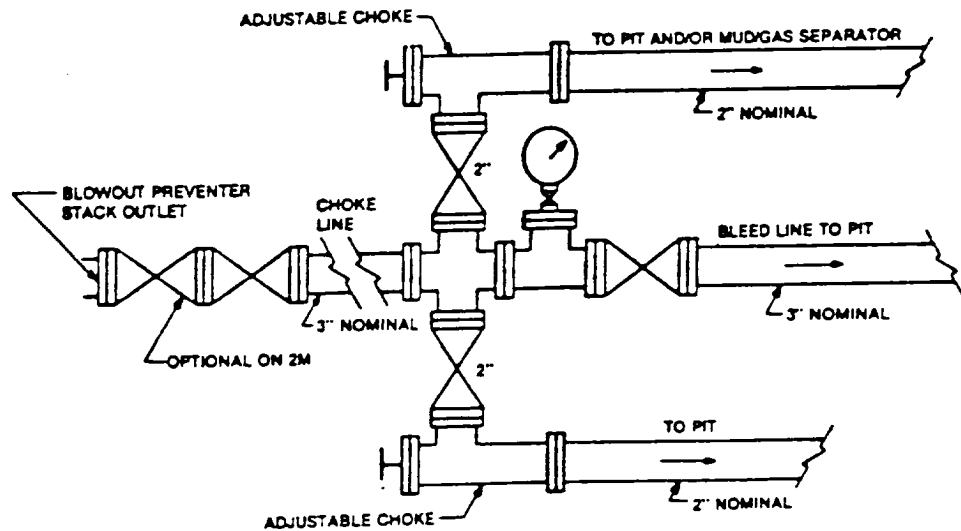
Typical choke manifold assembly for 2M and 3M rated working pressure service — surface installation.
